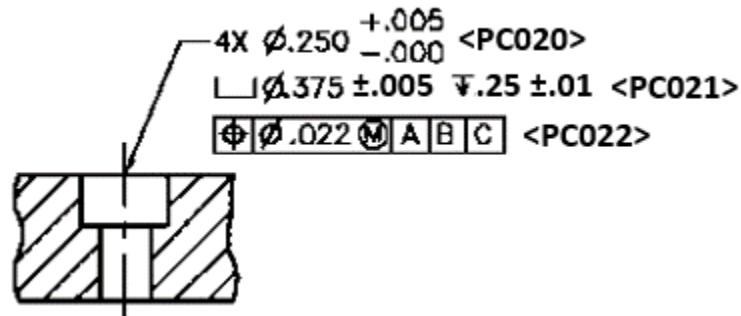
4X Counterbored Holes with One Position Tolerance
